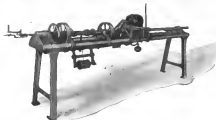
GENERAL VIEW OF THE EDSTROM WIRE-WRAPPING MACHINE
